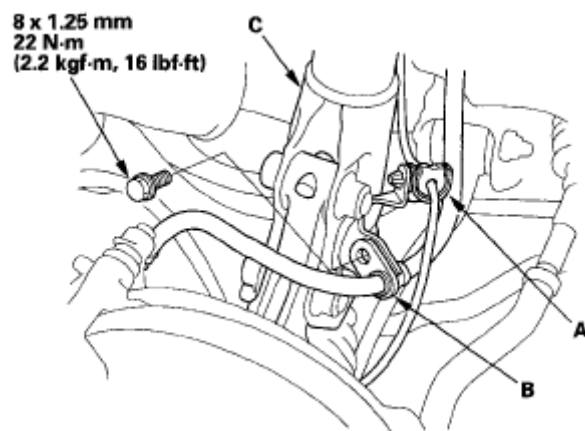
Identifying Wheel Sensor Harness Clip And Brake Hose Bracket (With Torque Specifications)
